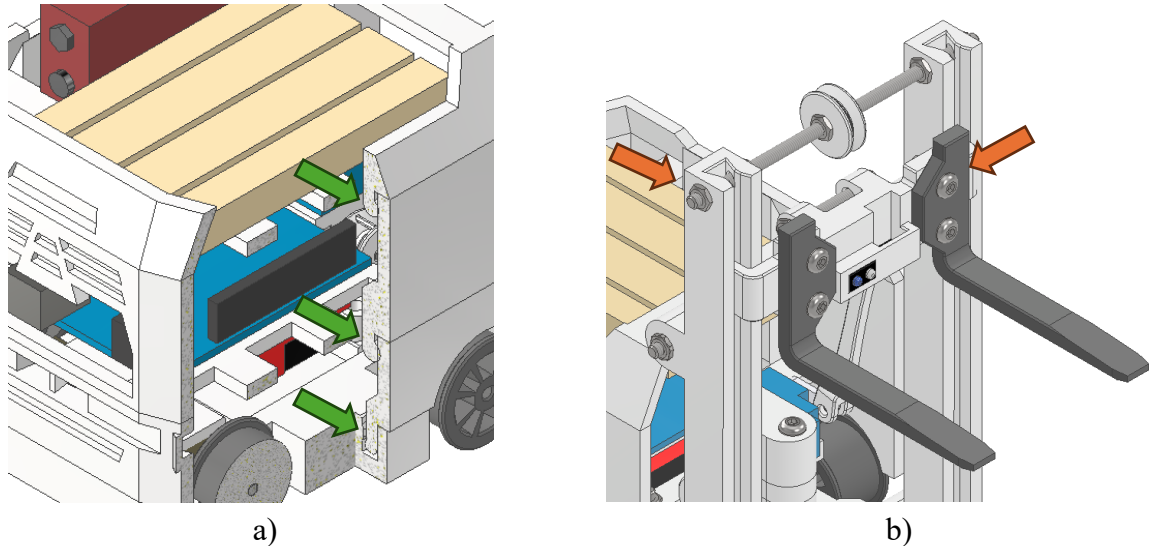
a) Elements assembled through clamping, b) screw-nut assemblies.
